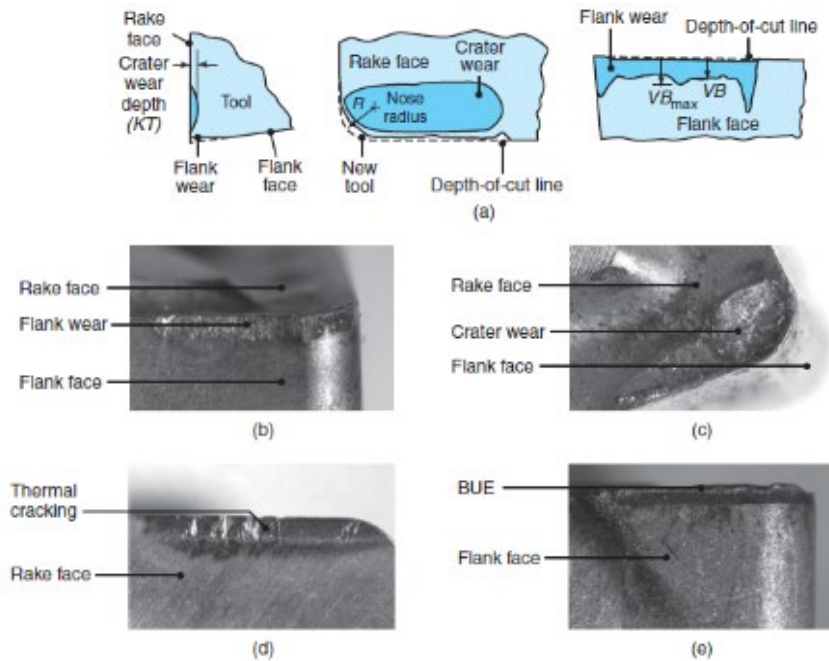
(a) Some features of wear in single point cutting inserts, with VB indicating the average flank wear. (b) - (e) illustrates different cutting insert wear: (b) flank wear, (c) crater wear, (d) thermal cracking (temperature failure), (e) and flank wear and built-up edge [110]
